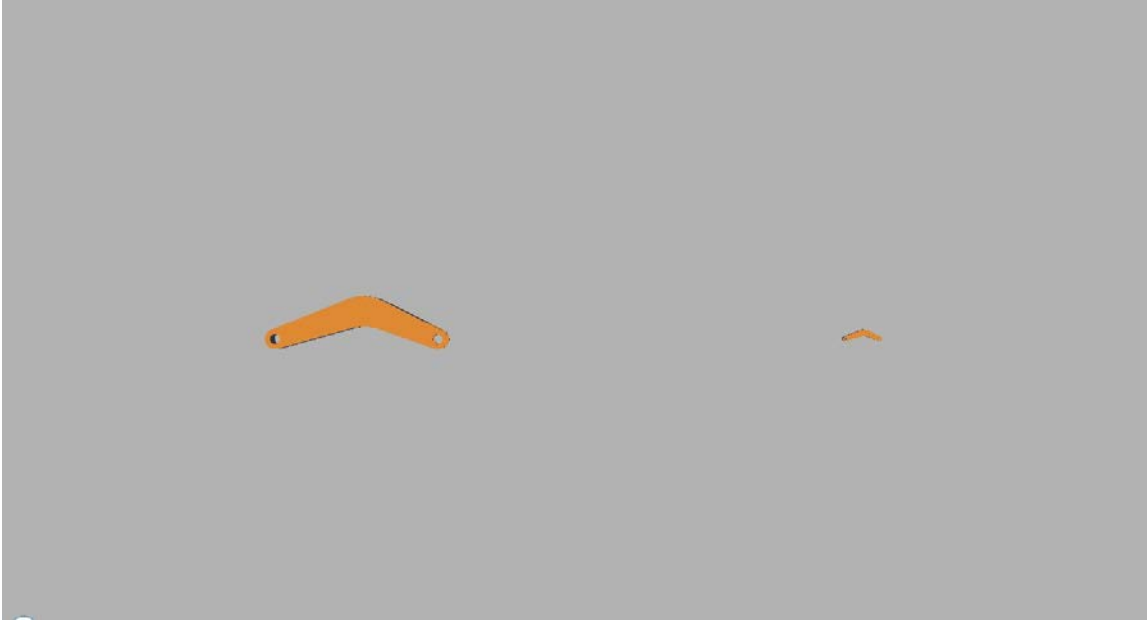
Resized equipment components preview after processing in the Dimensioner application
